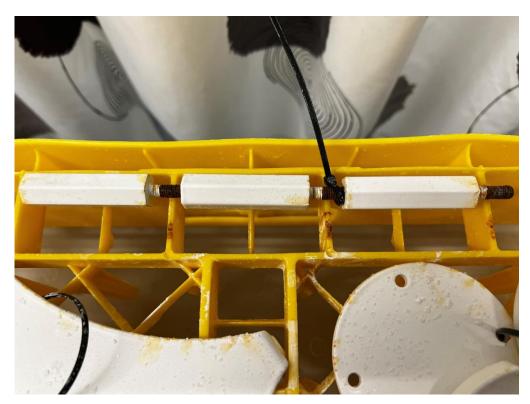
Visual inspection. (Hex standoff P/N: 20006) corrosion along edges and on screw thread.
